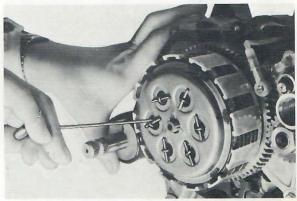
Taking off clutch spring pins with clutch spring hook (special tool No. 09920-20310)
